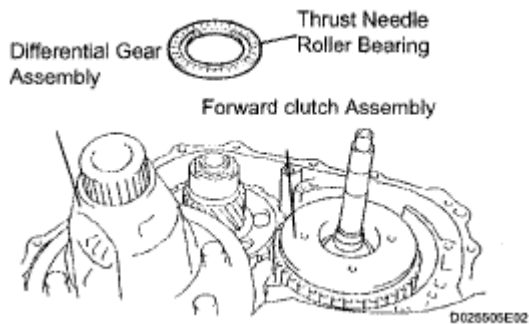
Identifying Forward Clutch Assembly And Differential Gear Assembly
